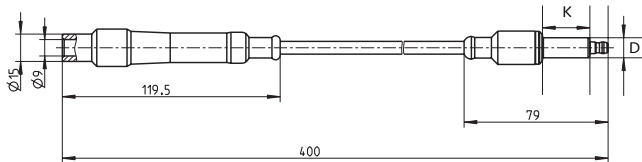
Spark plug extension cable Type 1500A97 (L = 400 mm)
